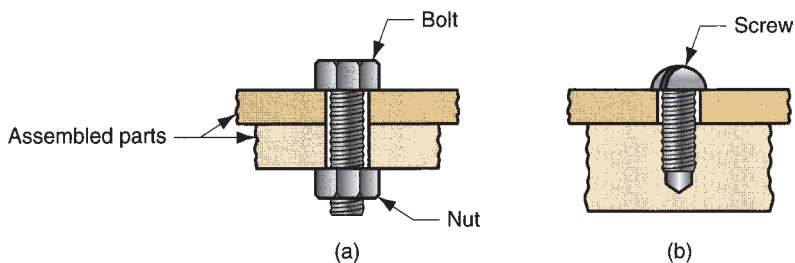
Typical assemblies using (a) bolt and nut, and (b) screw.
